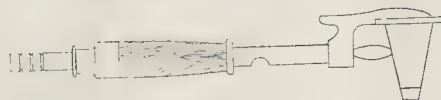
Self-heating Soldering iron for Leaded Window Makers.
